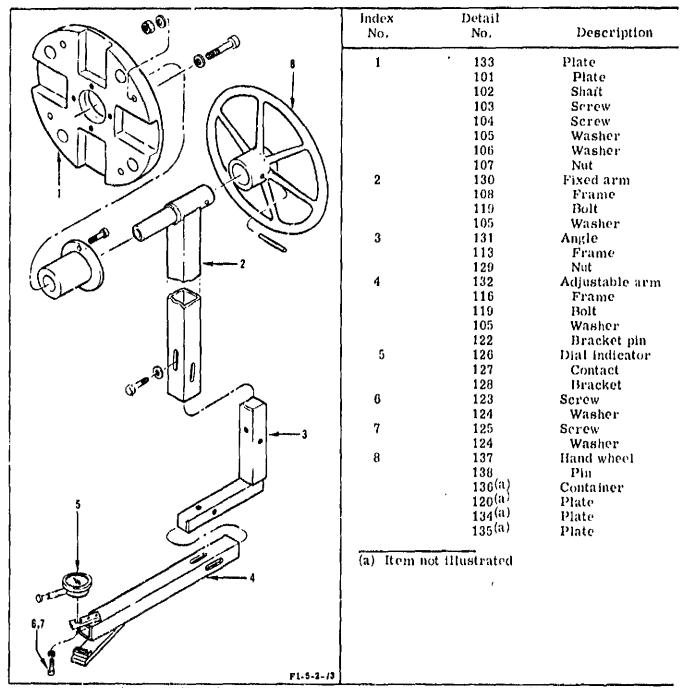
Assembly Jig and Inspection Check Fixture T-5037452
